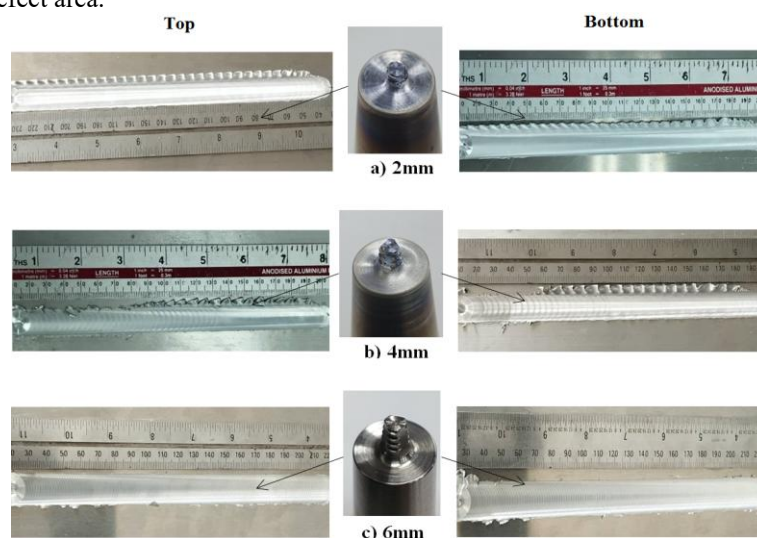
Comparison of the top and bottom weld joints of three different sizes of the pin tool
